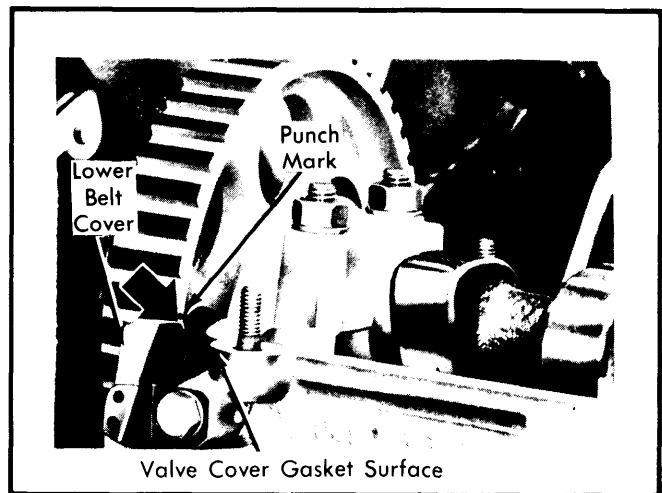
Camshaft Drive Sprocket Timing Mark Alignment
